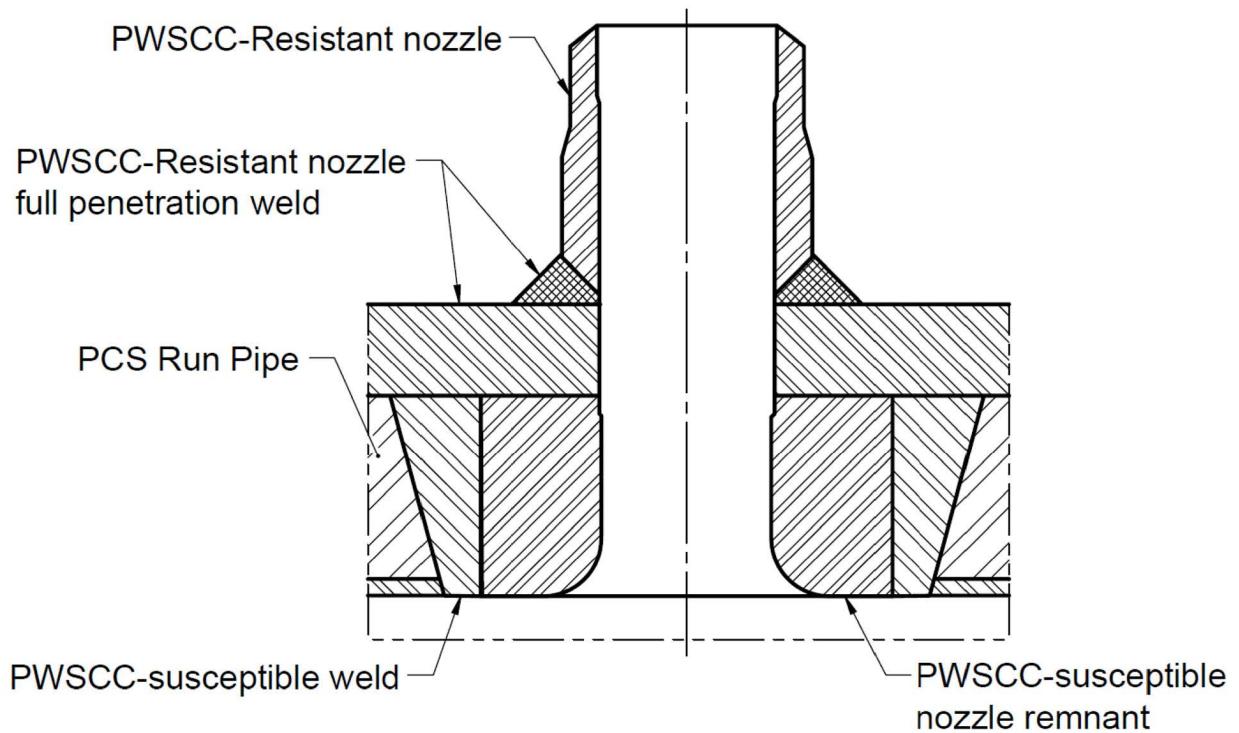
Spray Outlet Nozzle Full Penetration Corner Weld
